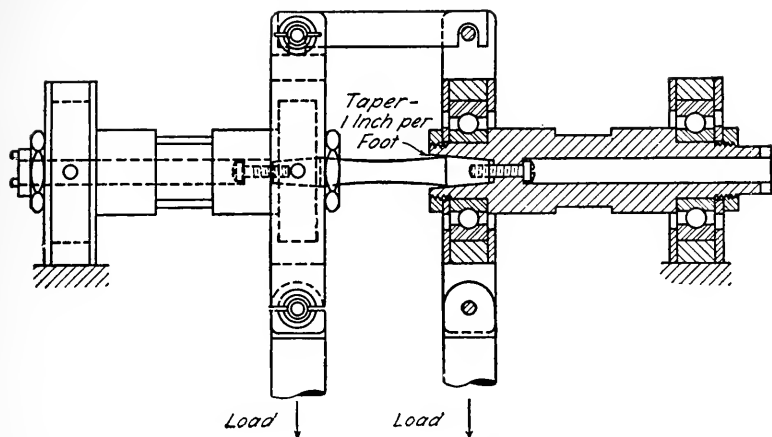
Holders for short specimen in rotating-beam-type testing machine. (Ono.)
